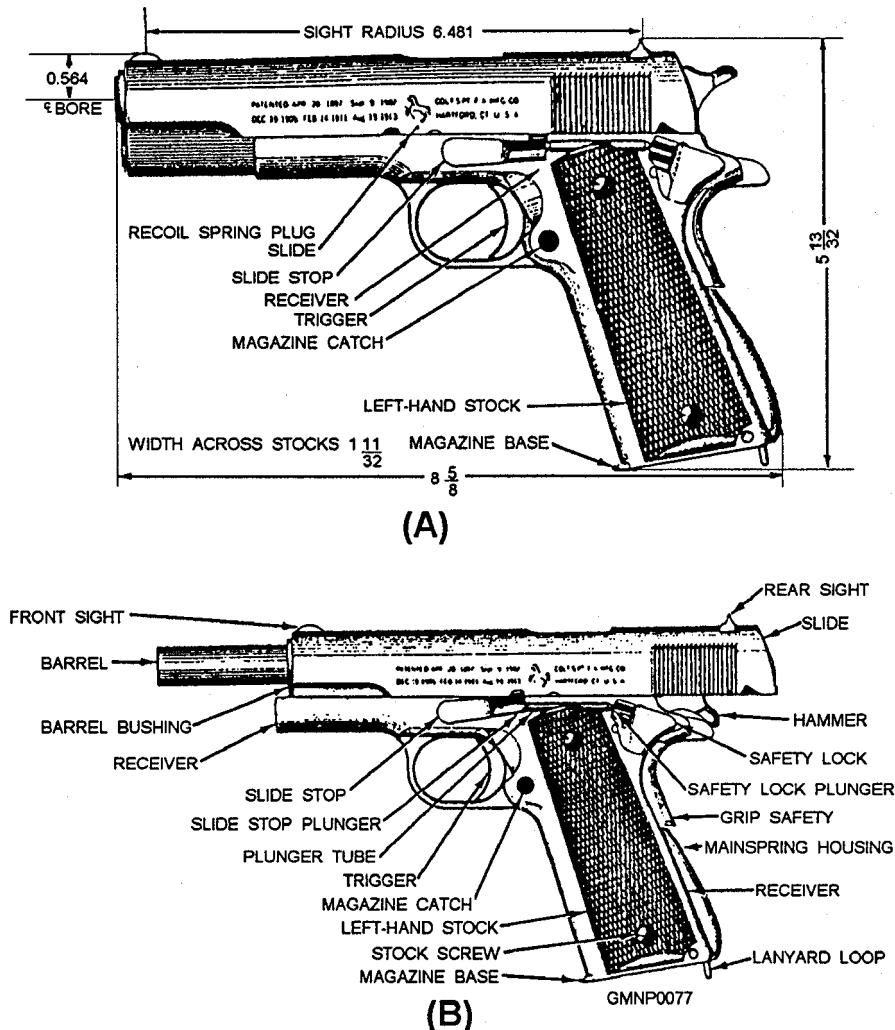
45-cal. M1911A1 semiautomatic pistol: (A) Slide closed; (B) Slide open.
